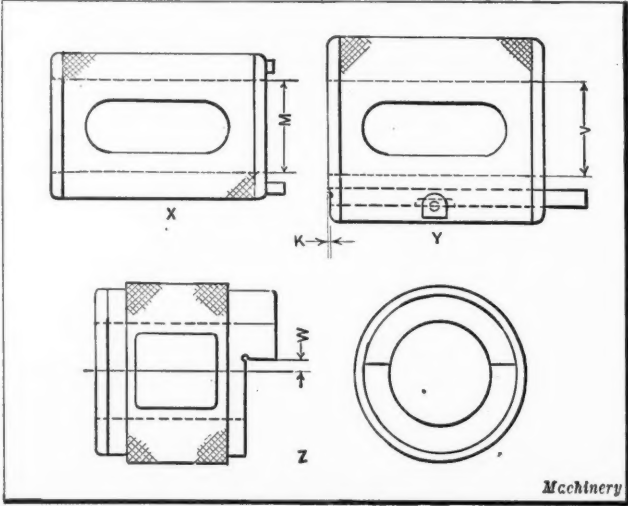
(X) Gage to which Taper of Arbor is turned; (Y) Flush-pin Gage for Final Inspection of Taper of Arbor; (Z) Gage for testing Alignment of Lugs after Assembly
